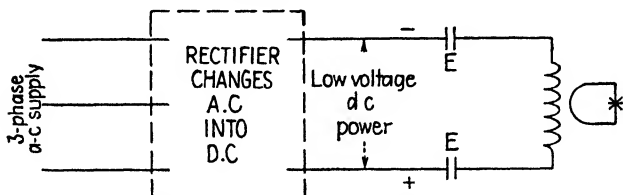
C.—Basic circuit of reactor-storage (Sciaky) welder.
